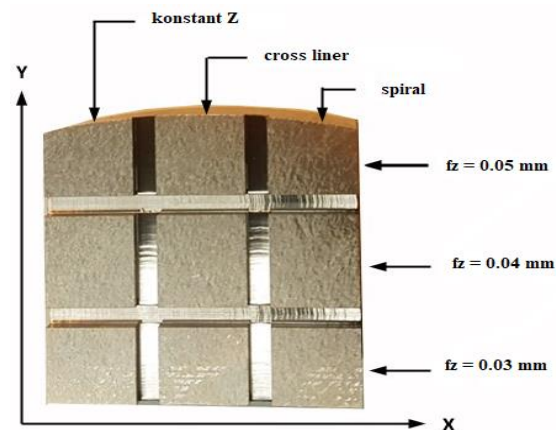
View on work-piece with used cutter path strategies and feed per tooth
